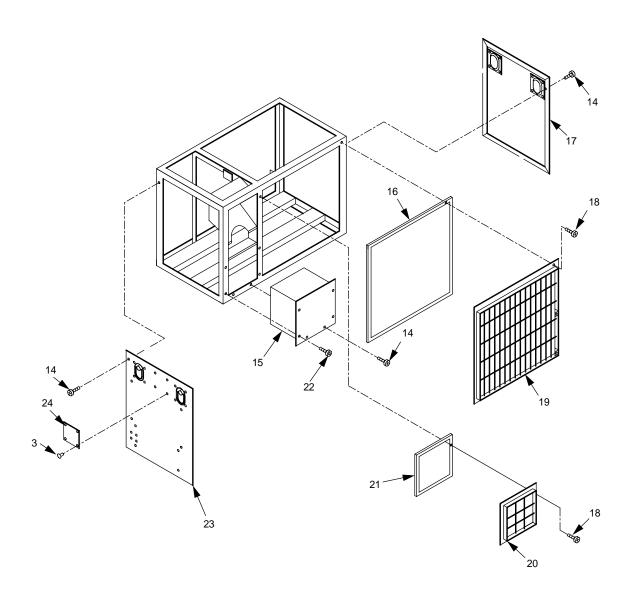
Condenser Assembly (Sheet 2 of 6)
